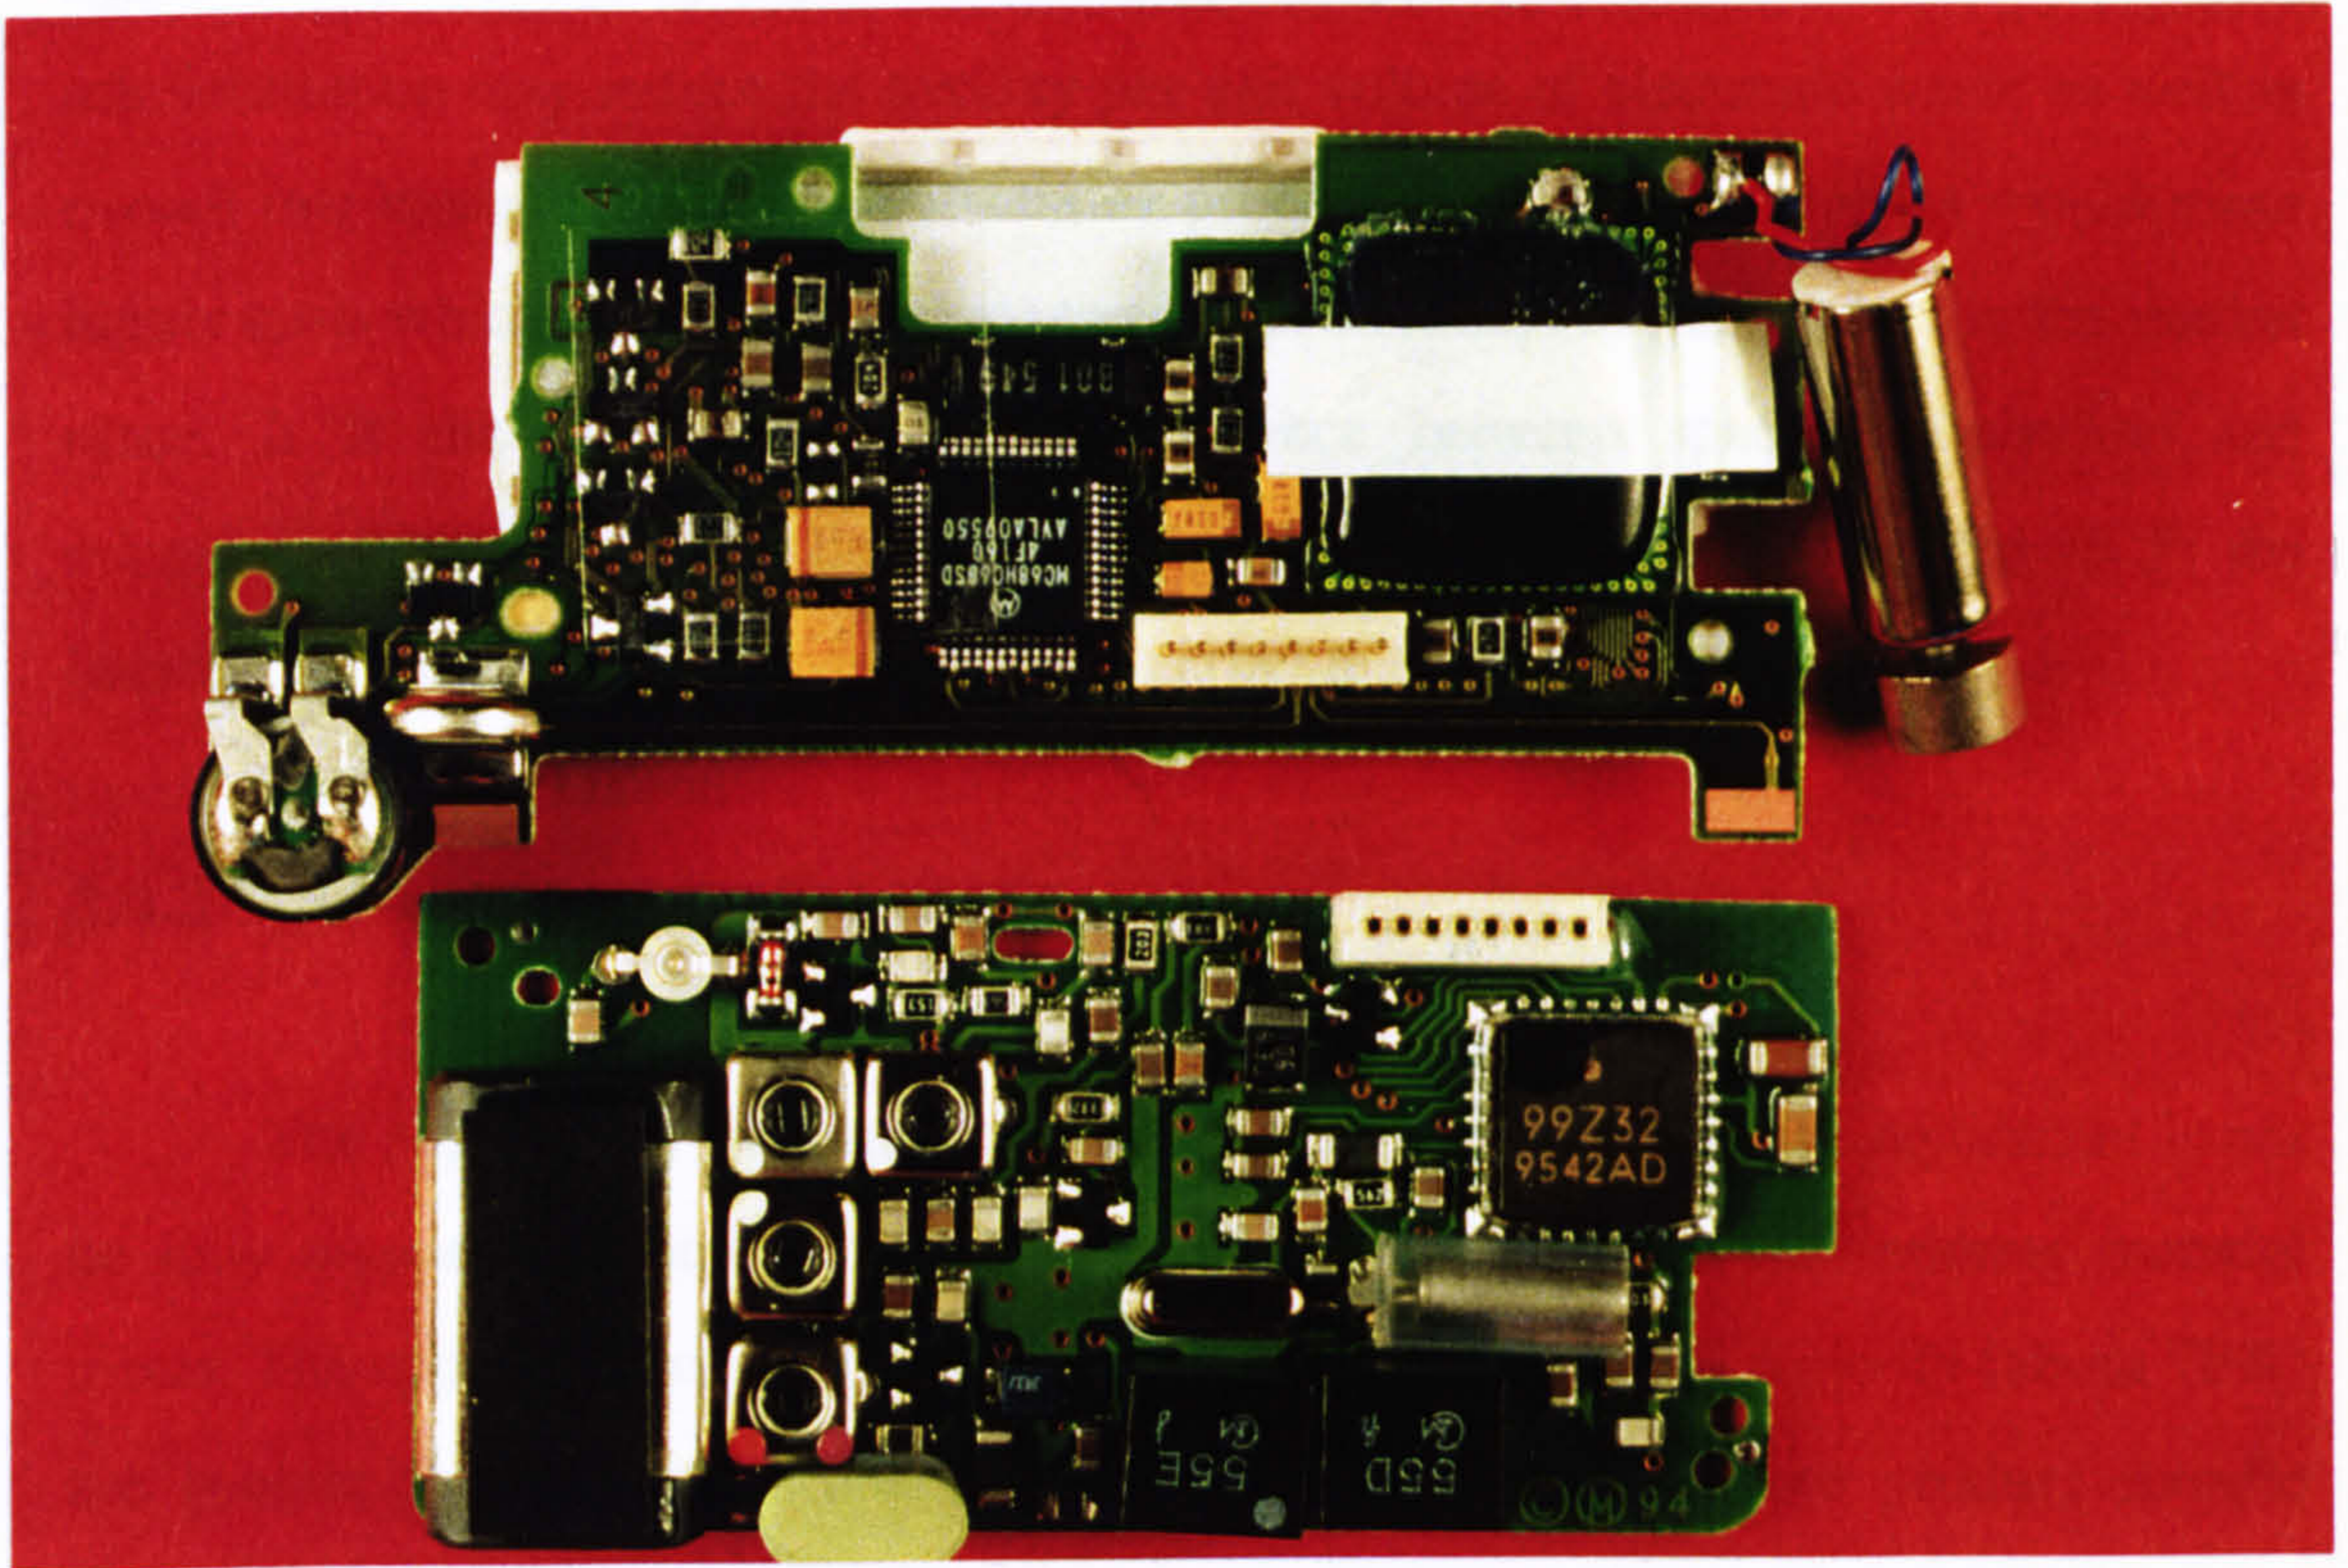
PCB layout of the pager depicting a mixture of both fine and coarse pitch components
